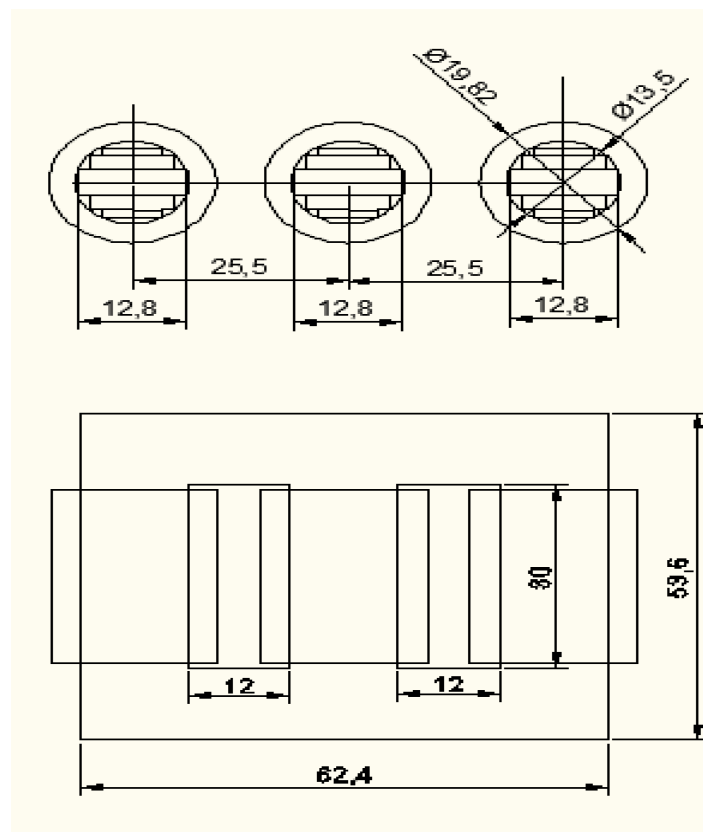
Designed line drawing dimensions of window in AUTOCAD
